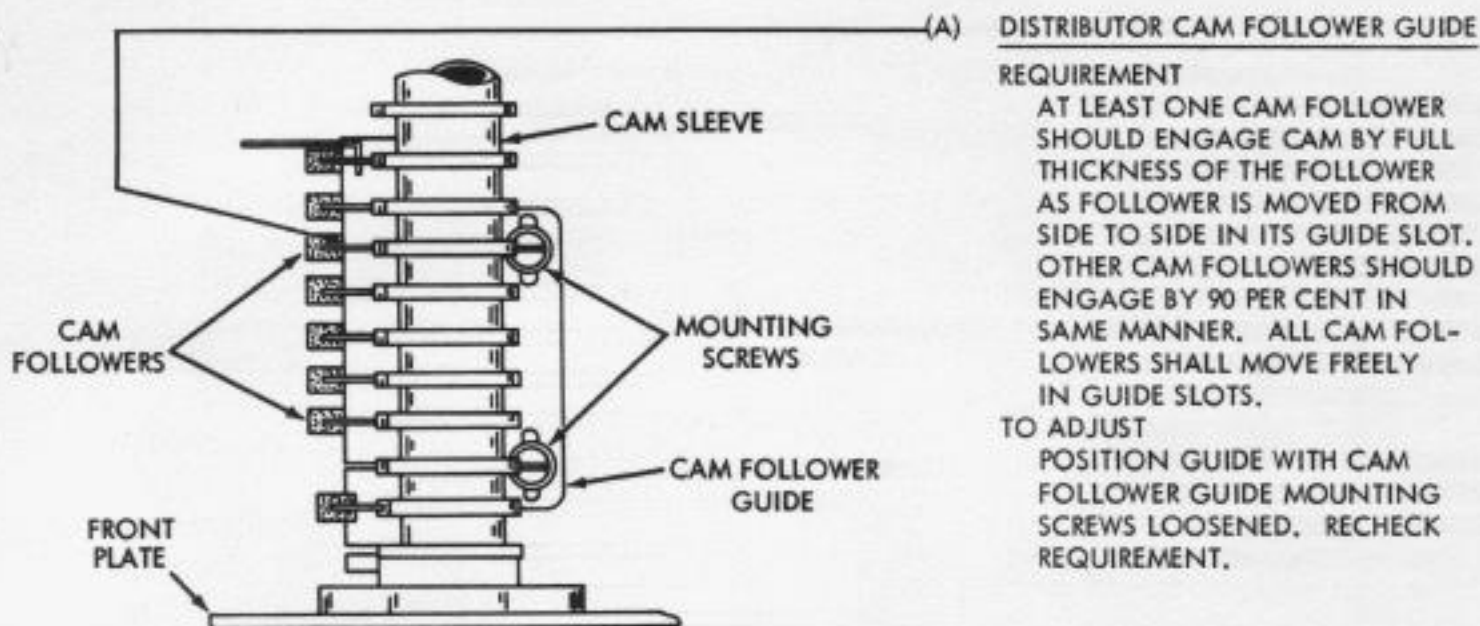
DISTRIBUTOR CONTACT MECHANISM
